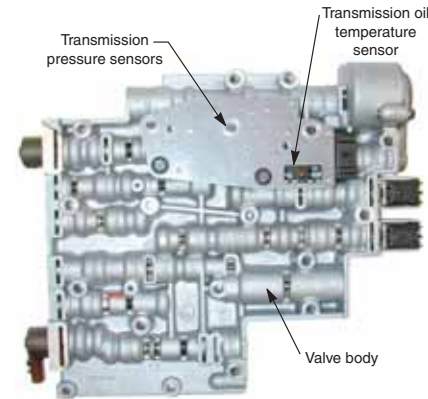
Most transmission sensors are located inside the case, usually on the valve body. On this particular valve body, all the pressure sensors and the temperature sensor are installed in a plate. The plate is then attached to the valve body. Also note the pressure control solenoids on the outside edges of the valve body. (Sonnax)
